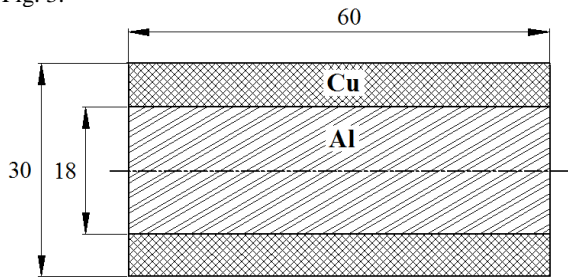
Configuration of the bimetal rod before extrusion (dimensions are in mm).
